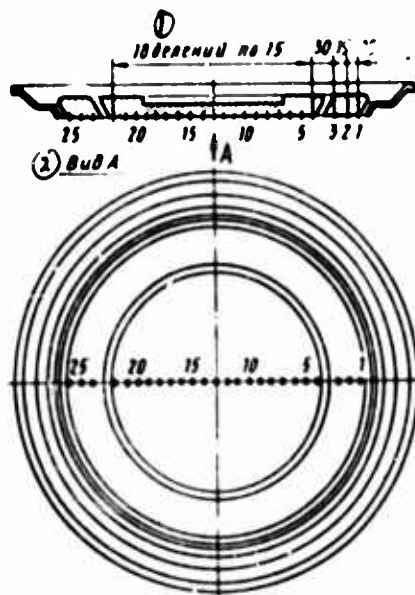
Arrangement of drainage openings on two-pass nozzle insulation
